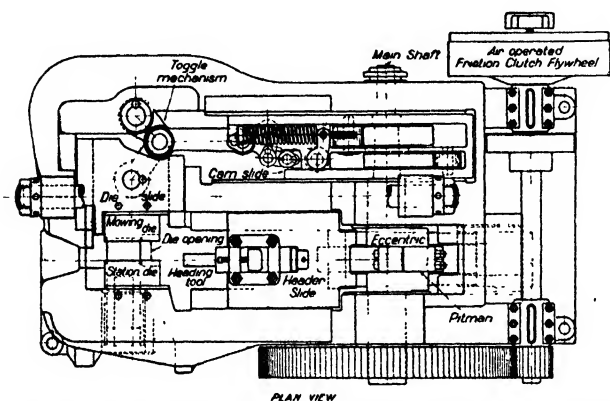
A plan view of a forging machine showing arrangement of working parts.
